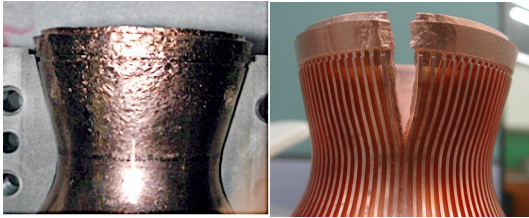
Appearance of orange peel (left) or tearing (right) during bulging test of nozzle throat part.
